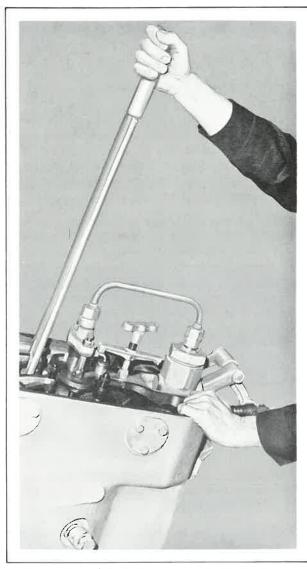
DEPRESSING VALVE SPRING WITH ROCKER ARM DEPRESSOR TOOL.
